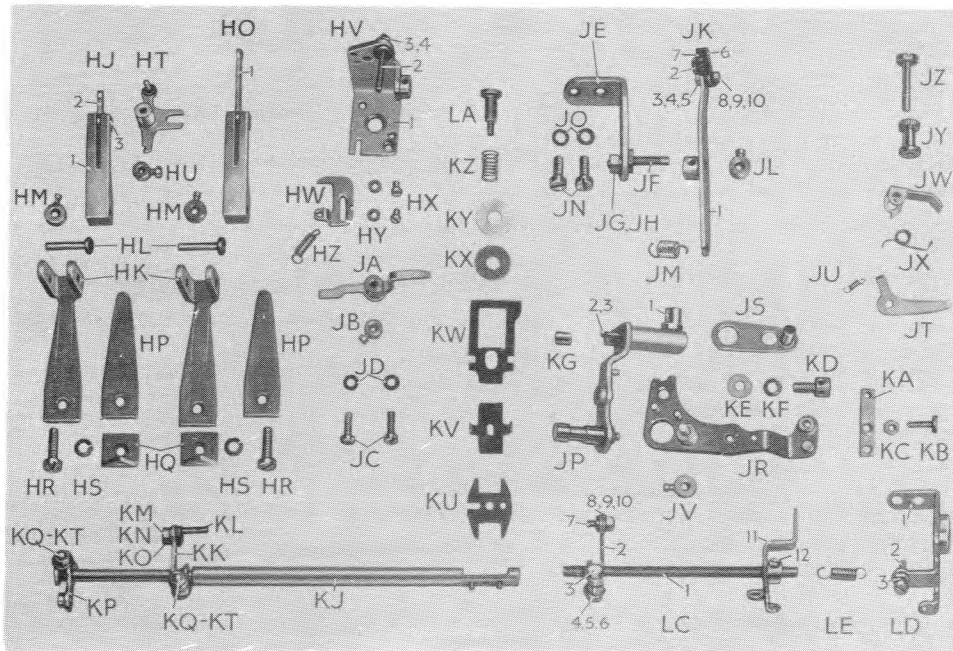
PARTIAL ASSEMBLY COMPONENTS.
